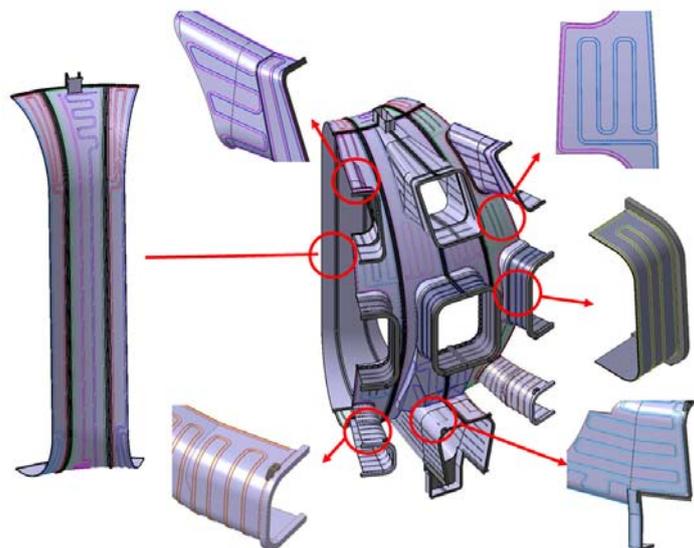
Cooling line layout for ITER vacuum vessel thermal Shield.
